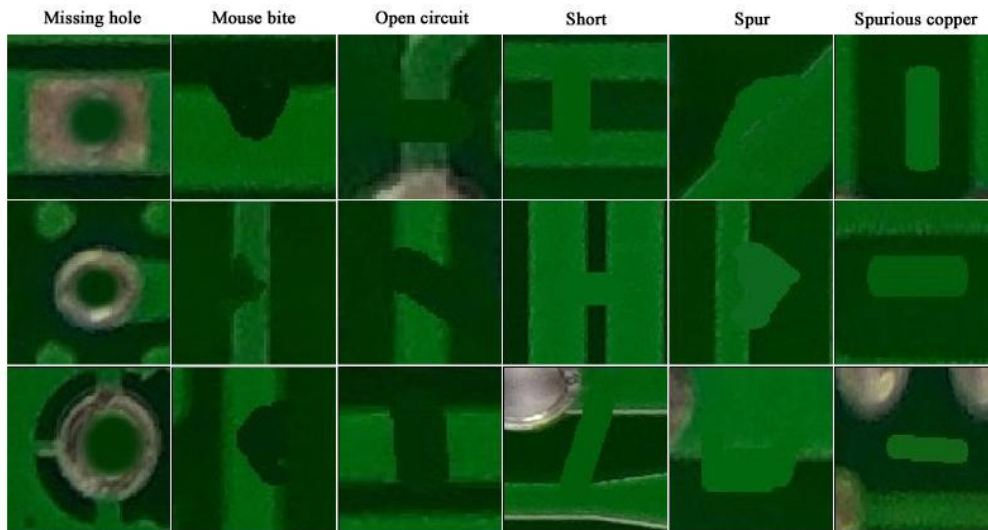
PCB surface defect types (Huang and Wei, 2019)
